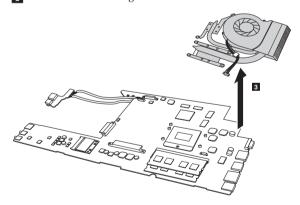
Removal steps of fan assembly and heat sink assembly (continued) Z475: Loosen six screws 2.
